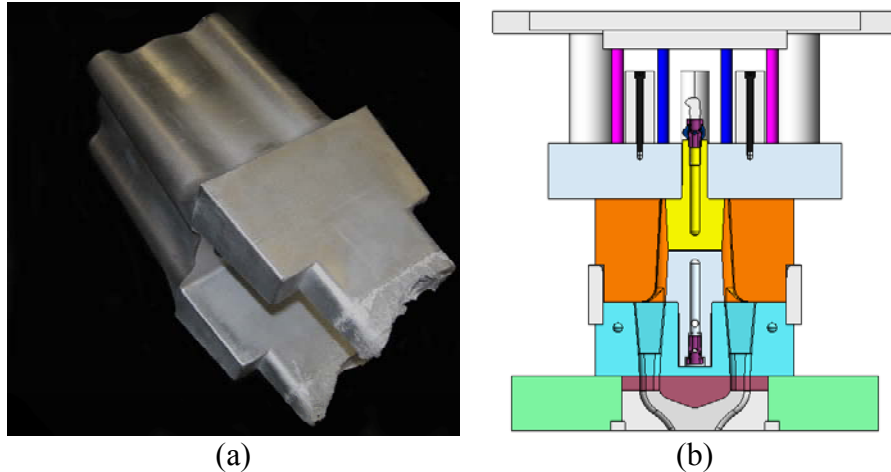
(a) The mono-cylinder engine block and (b) mould die used for the production of castings.
